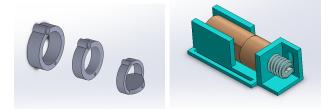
Rings that are worn on the finger with holes for spring, and cable(*left*) and entire motor mount and spool assembly that tensions cable.
